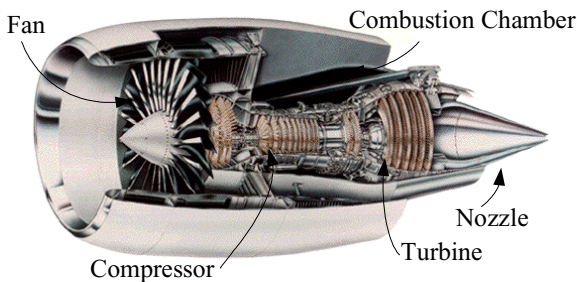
Cutaway of a turbofan jet engine (Courtesy Pratt & Whitney)
